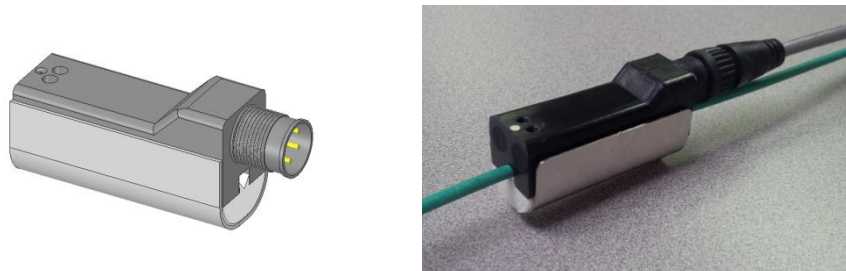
Sensor Module - 3D Views of the Sensor Module Assembly
